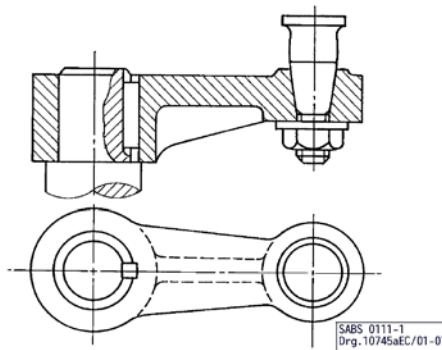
Rib, shaft, key, crank pin, nut and washer, not sectioned
